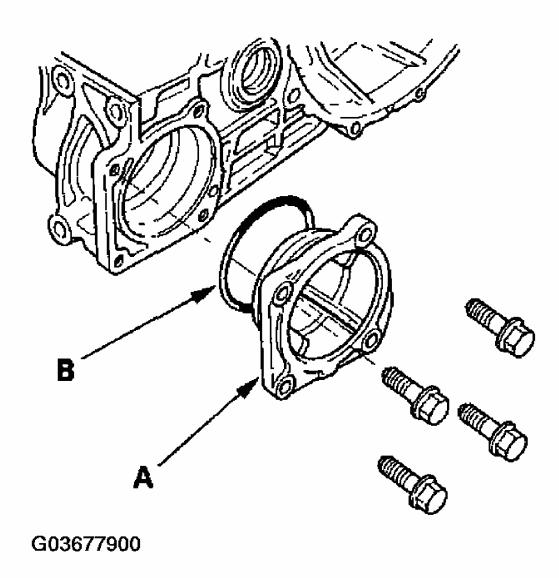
Removing Clutch Housing Side Cover (2WD Model) Courtesy of AMERICAN HONDA MOTOR CO., INC.
